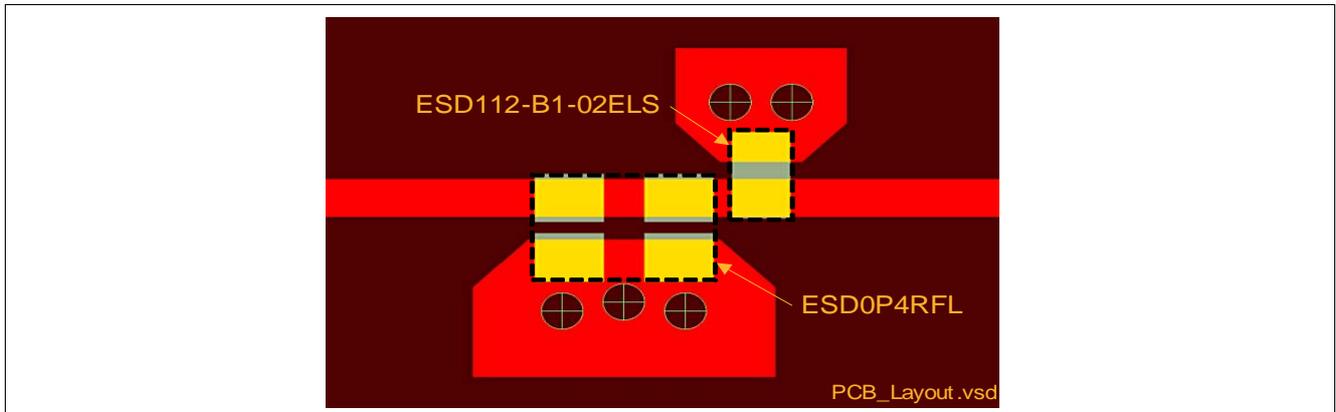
PCB layout example for ESD112-B1-02ELS and ESD0P4RFL
